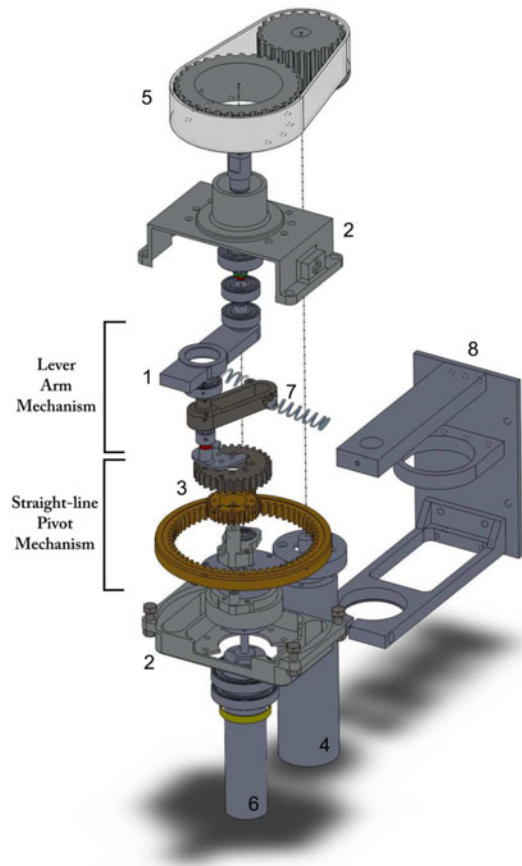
Exploded view of the vsaUT-II. The labels indicate the following: 1—the actuator output; 2—the rotating actuator frame; 3—the gears mechanism; 4—motor for changing equilibrium output position; 5—timing belt transmission; 6—motor for varying output stiffness; 7—the lever arm and springs; and 8—the fixed reference frame housing.
